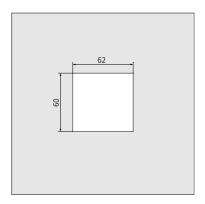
Dimensions (unit: mm) of the cabinet door opening for mounting the MD-BP-M $\,$
